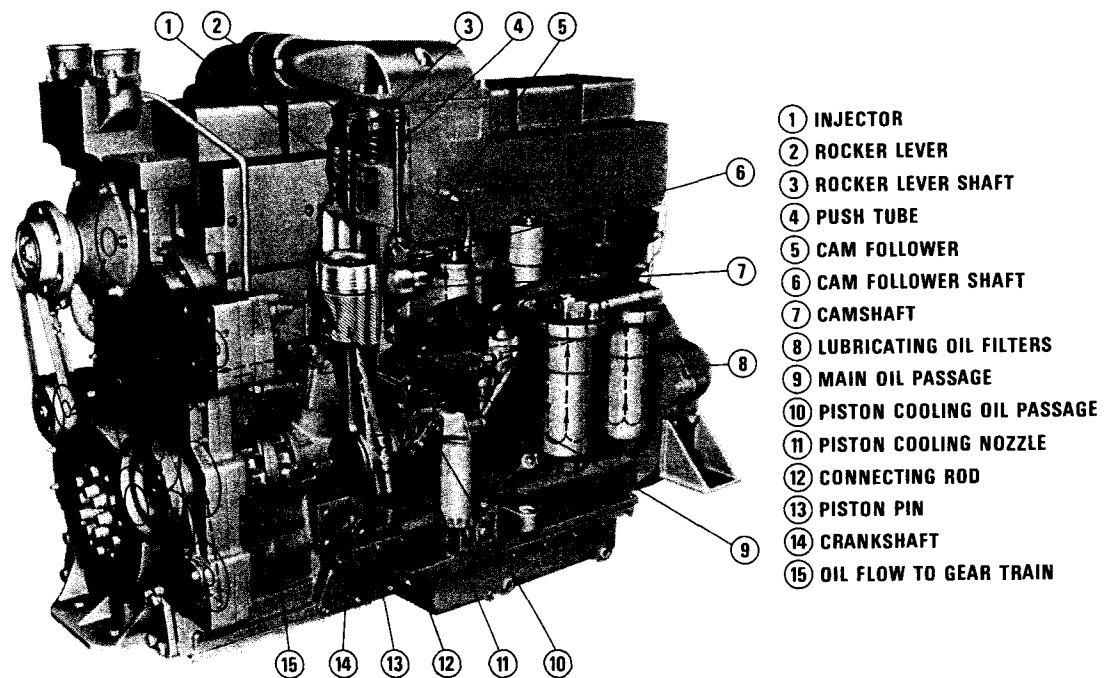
, (LWC-28). Lubricating oil flow — KT(A)-1150 Engine
